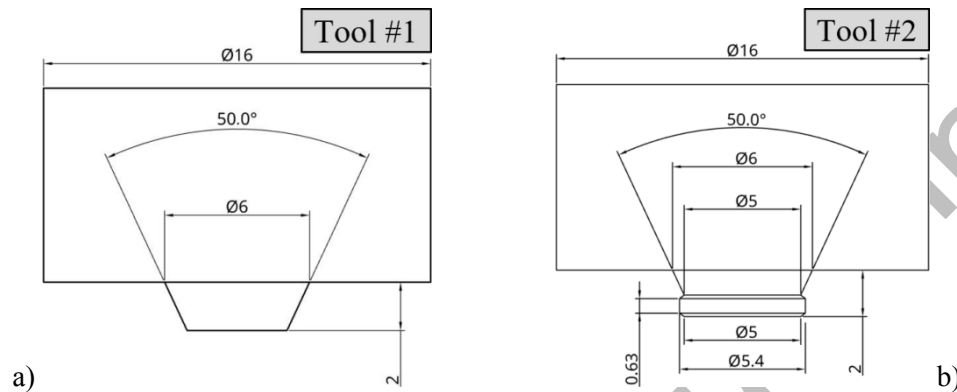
Tool geometries used in the experimental FSW tests: a) truncated conical pin and b) enlarged pin.
